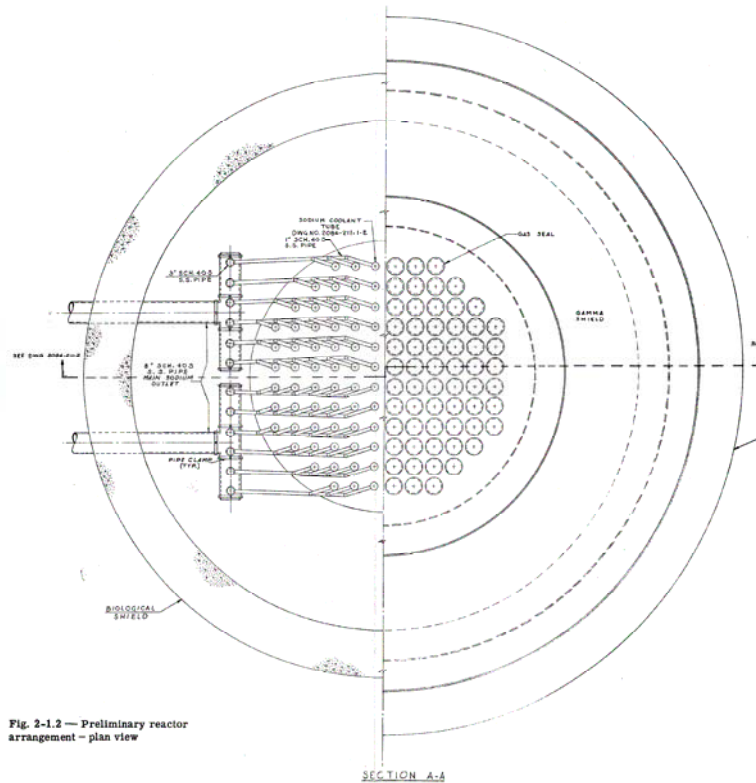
Preliminary reactor arrangement — plan view
